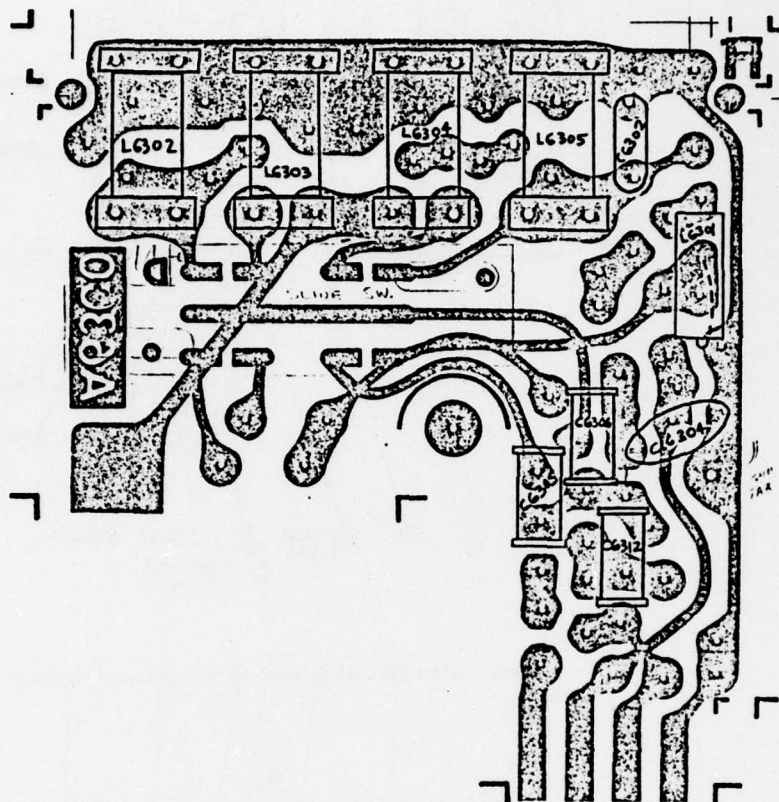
P.C. BOARD LAYOUT FOR THE A6300A
